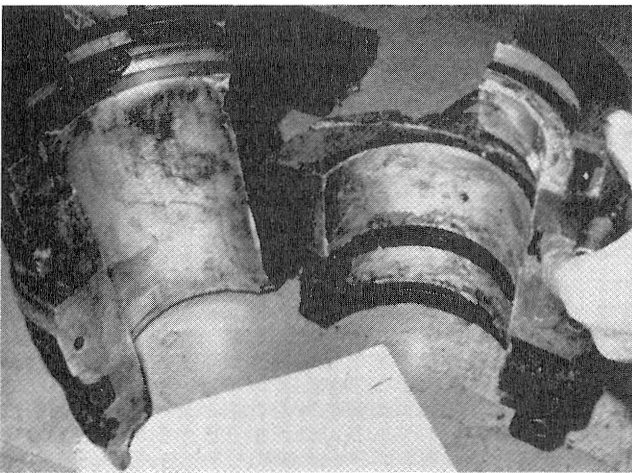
Inboard Bearing of Inboard Motor. Note Only Impact Type Damage to Babbitt and Shell.
